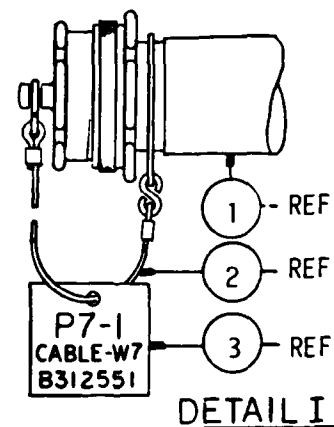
W6 Cable Assembly (Sheet 2 of 2)
